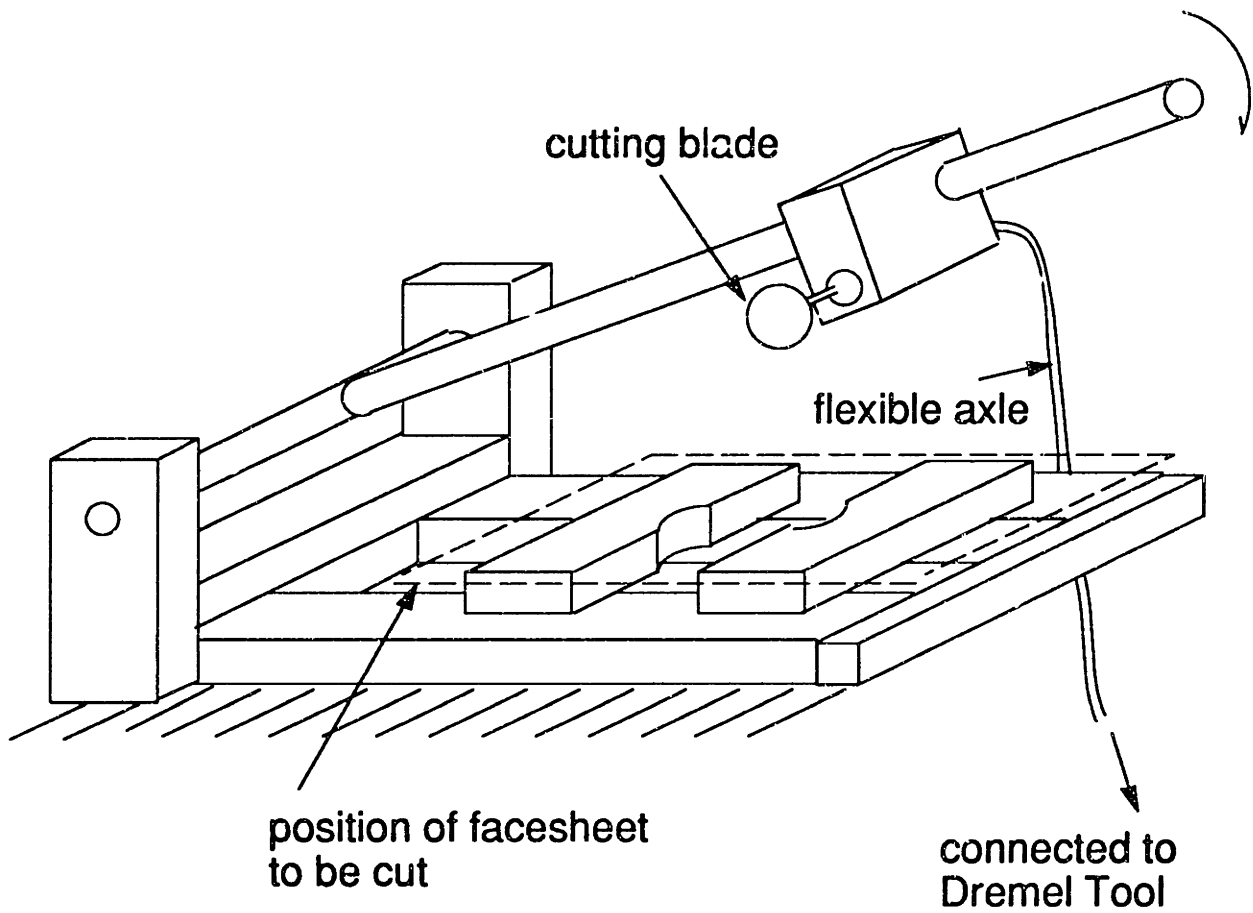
Illustration of jig used to cut slits in specimens with simulated facesheet damage.
